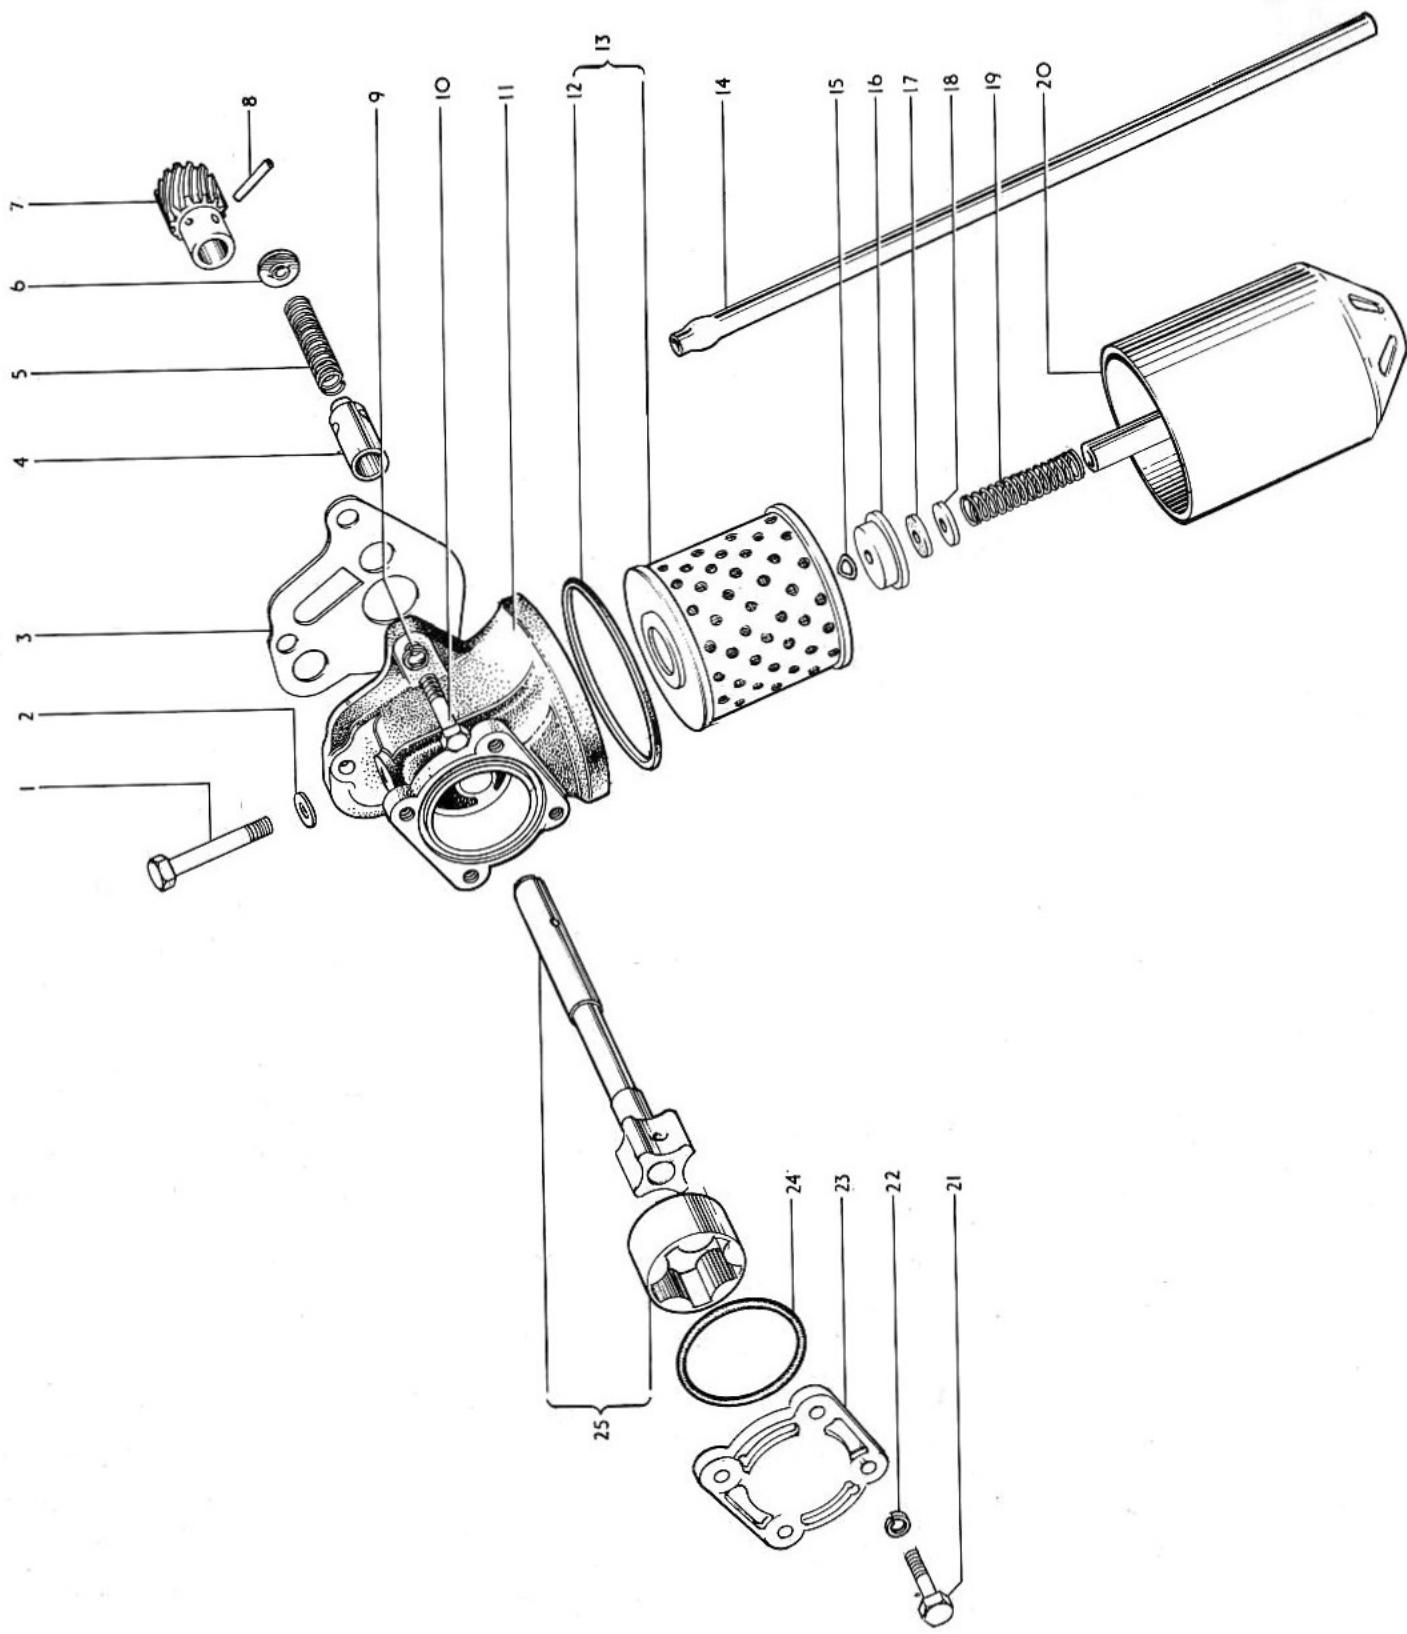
OIL PUMP AND FILTER COMPONENTS
